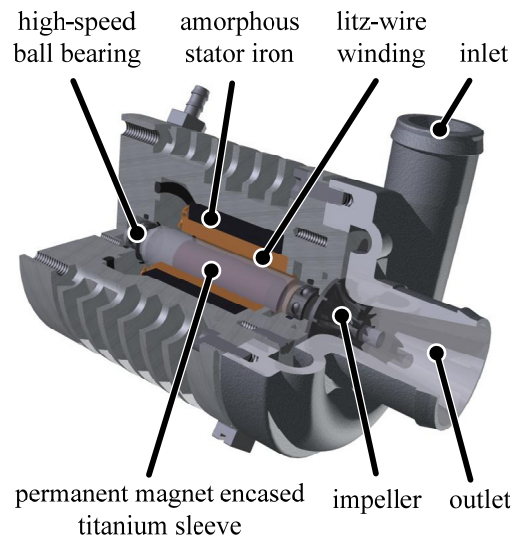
Solid model of the turbo compressor system. Dimensions: 33 x 43mm.
